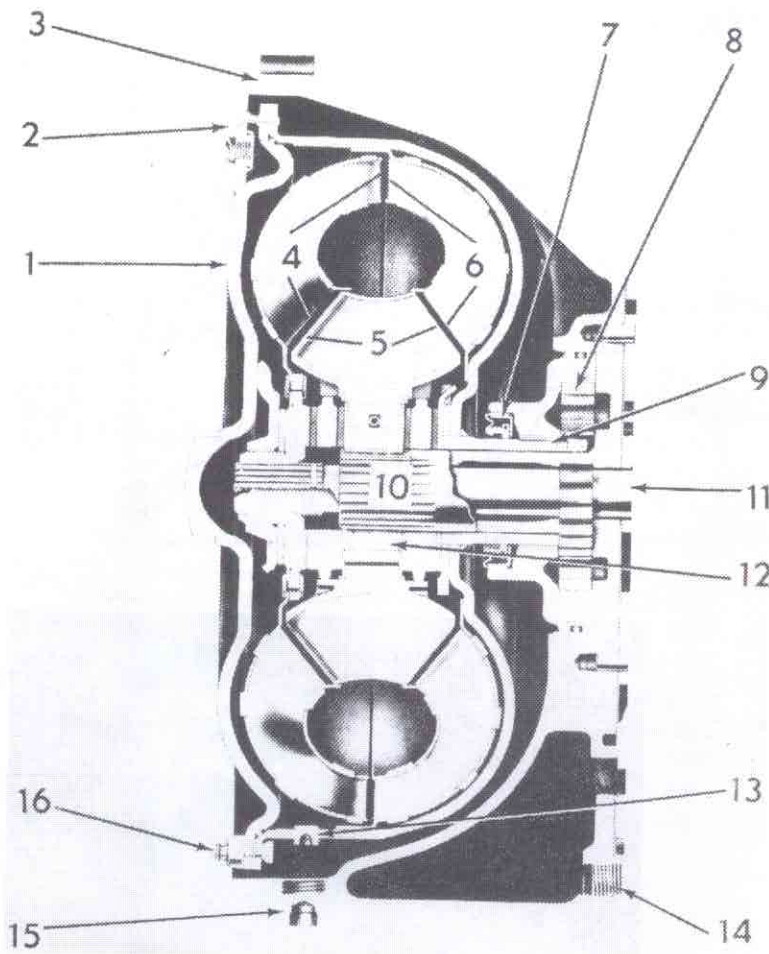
Cross sectional view—torque converter—starting with 1953 production
